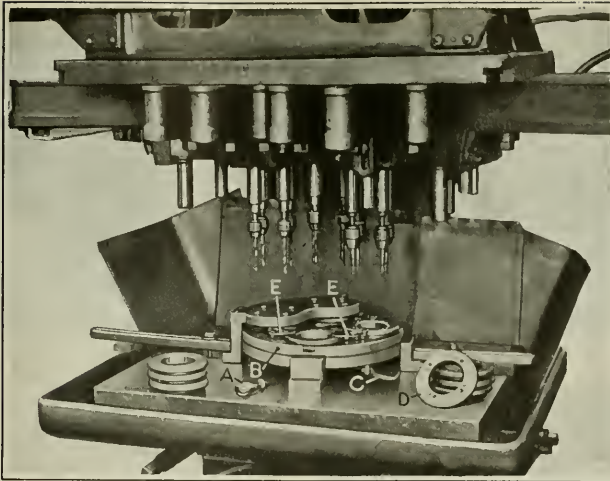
Multiple-spindle Drilling Machine of the Cluster Type, and Indexing Jig used in drilling Chaser Cam-plates
